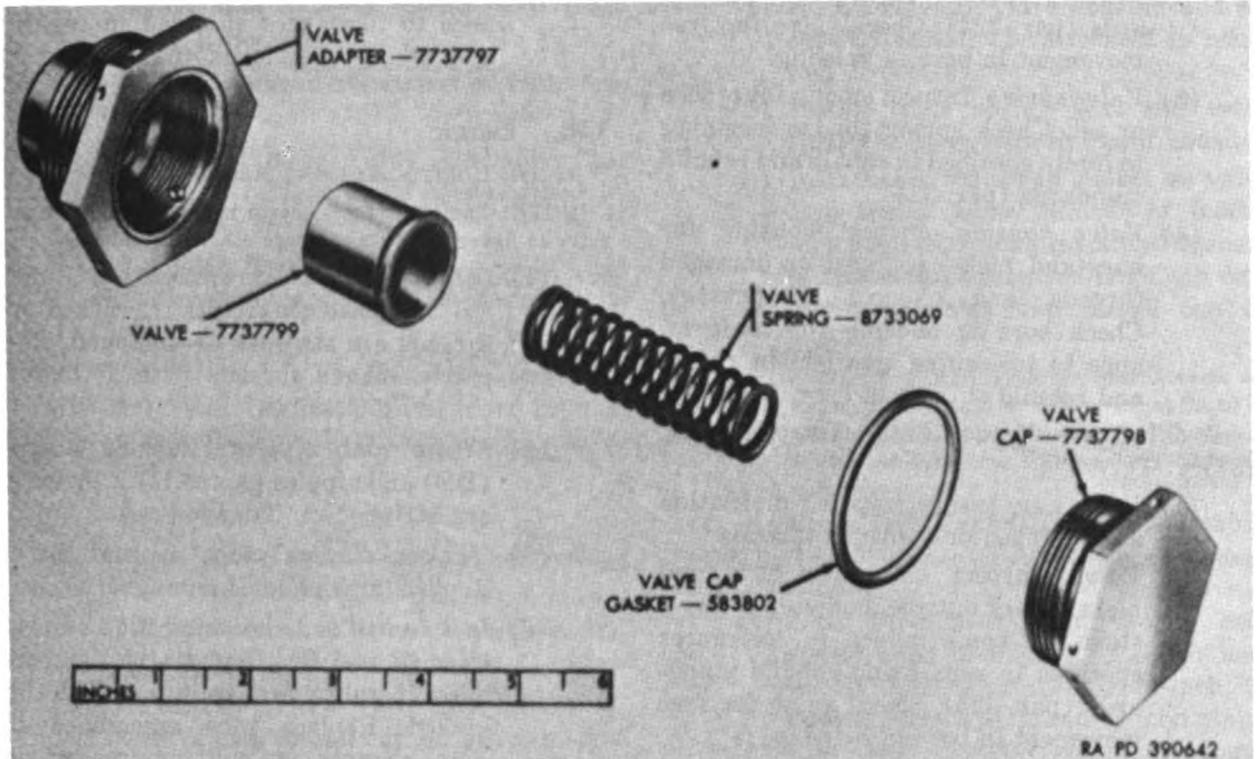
Fuel injector oil pressure regulator valve assembly—exploded view.
